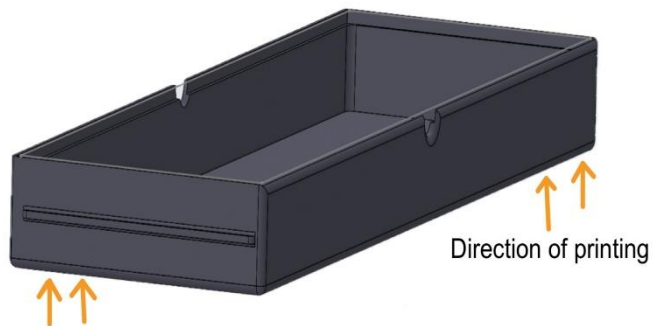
Isometric view showing the direction of the print for the drip tray.
